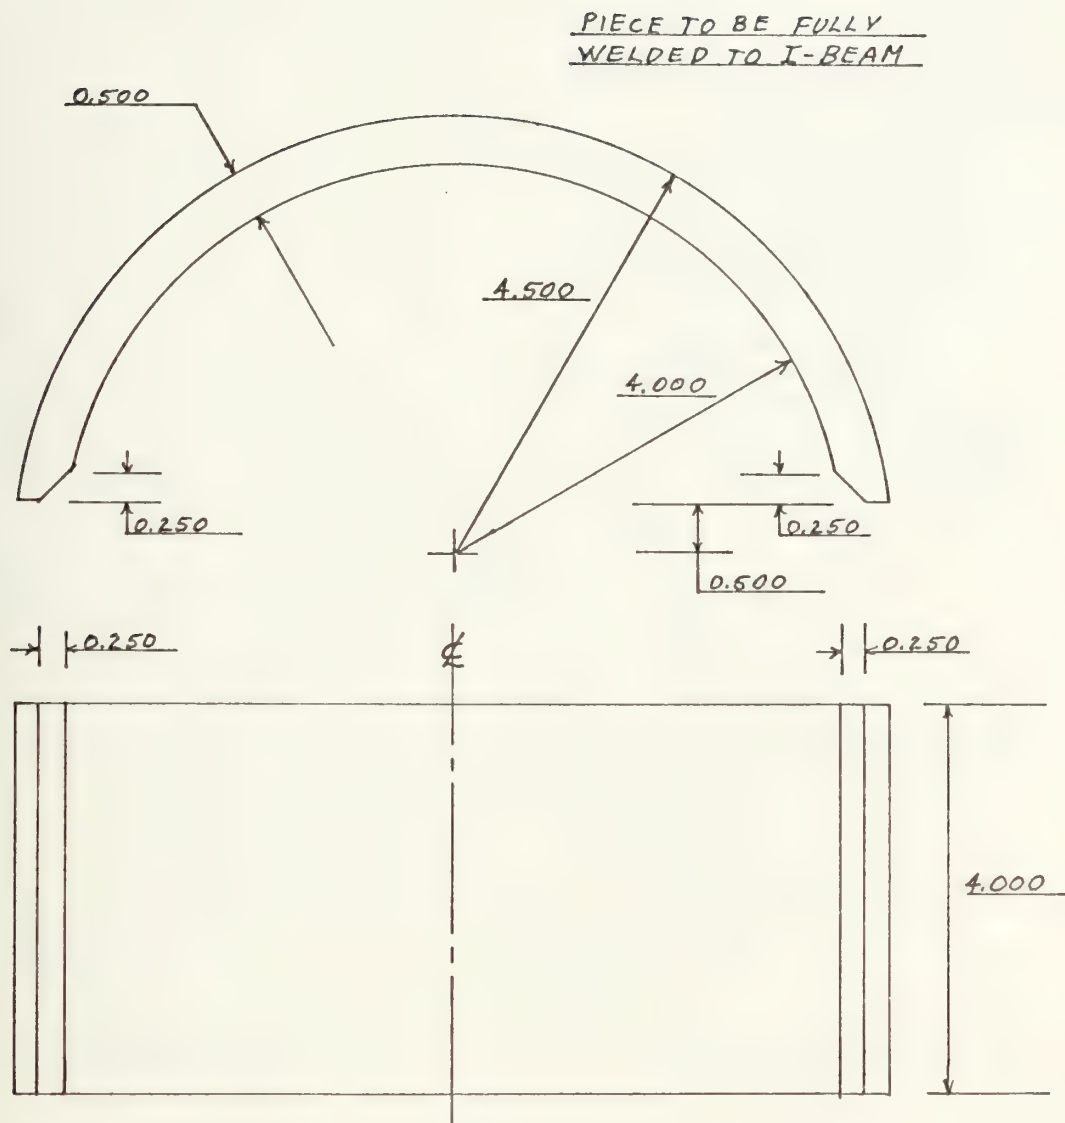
PIECE I-5-2, BOLT PLATES
